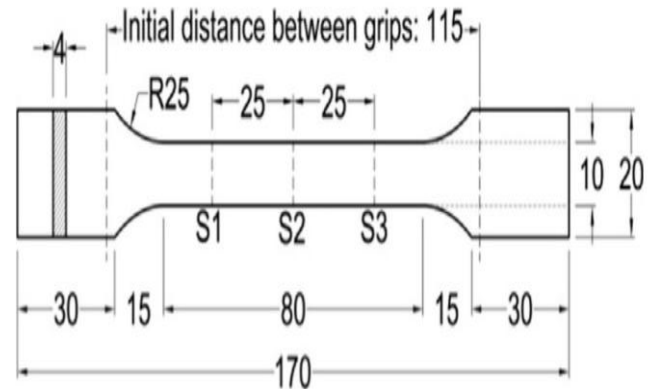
Dimensions of the BS EN ISO 527 tensile test specimen (all dimensions are in mm)
